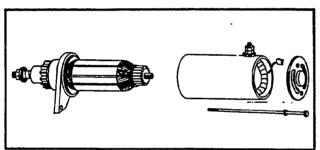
STARTER DISASSEMBLY (SPEC. A)
